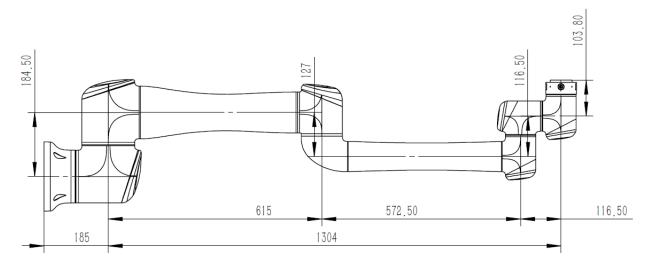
Mechanical dimensions diagram of the EC612 robot, with unit of mm
